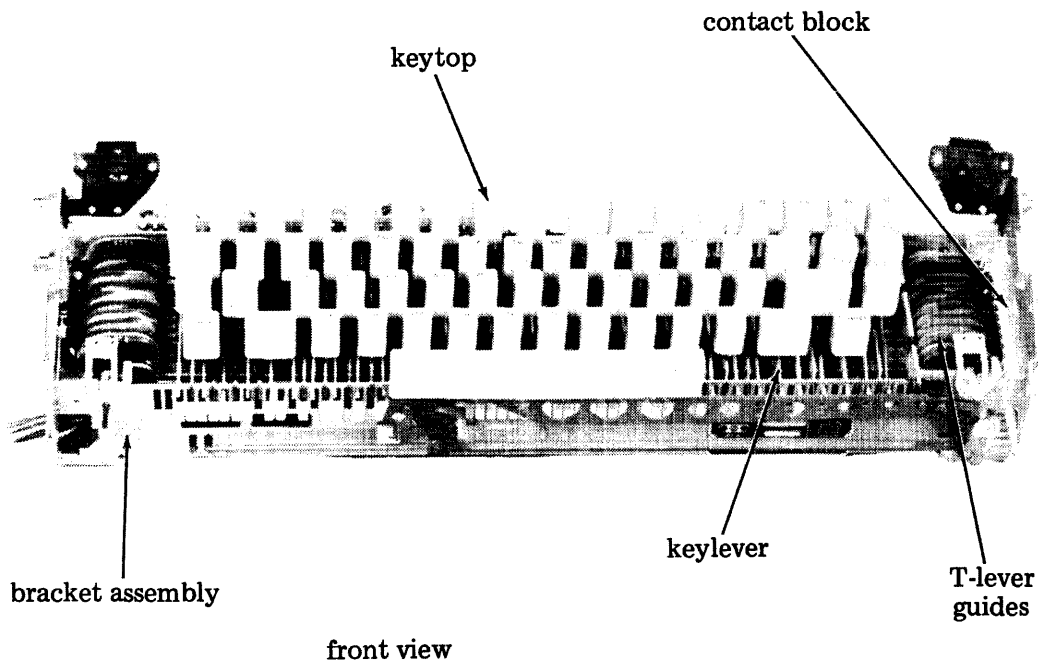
Keylevers, Keytops, and Contact Block Assembly
